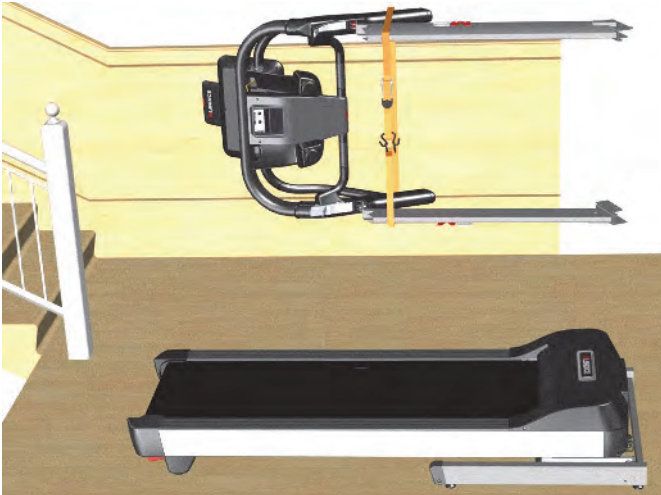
Remove Upright Pivot Bolts and Nuts
